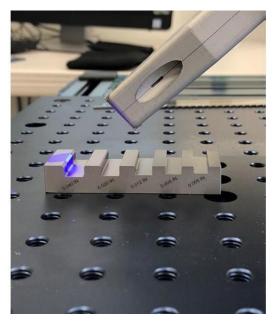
Measuring chamfers on an edge break standard with the 4D InSpec.
